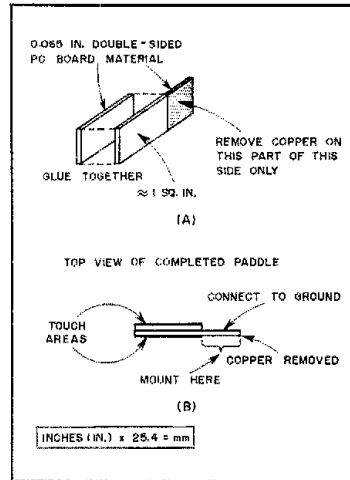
Mechanical details of the capacitive paddle. The completed assembly should be sprayed with two coats of clear lacquer.
